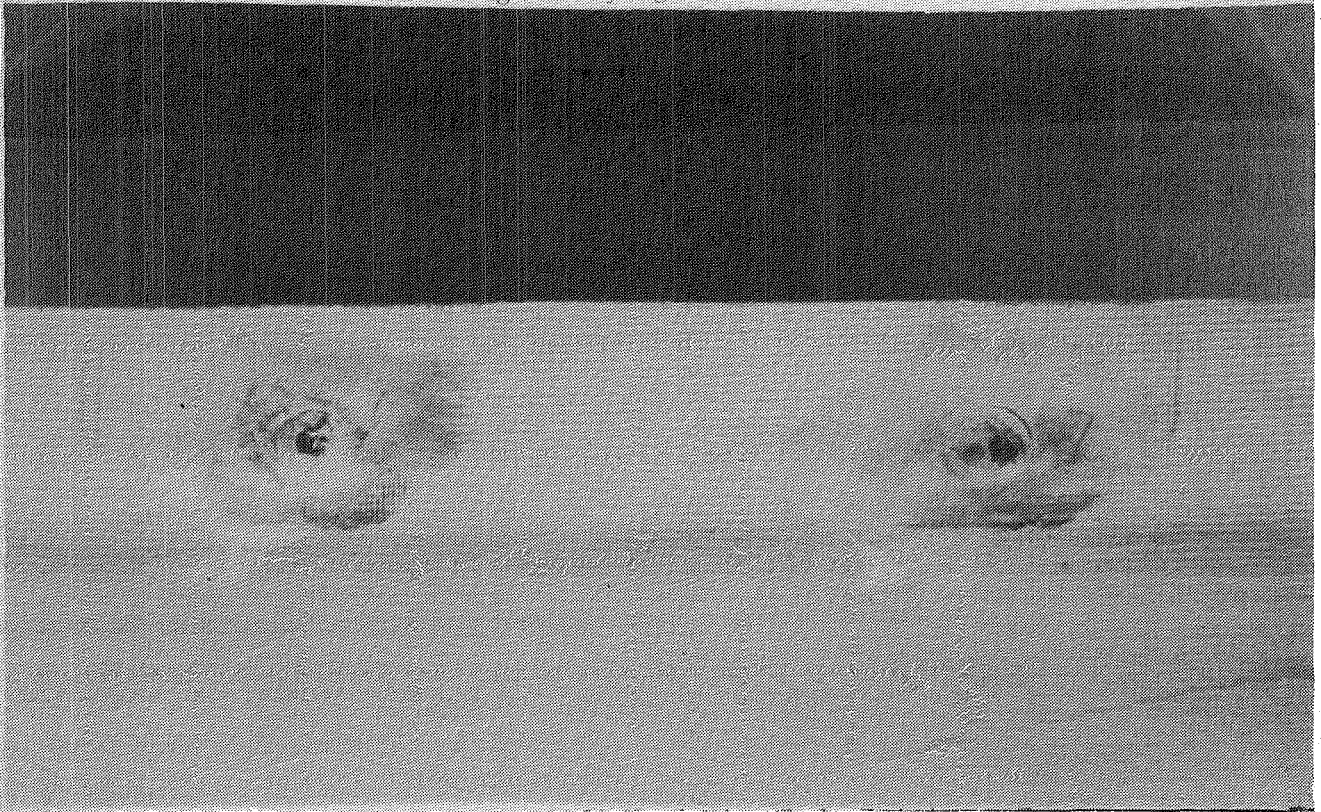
Eastern Left-Hand Wing-Body Fairing - Fastener Hole With Frayed Appearance.
